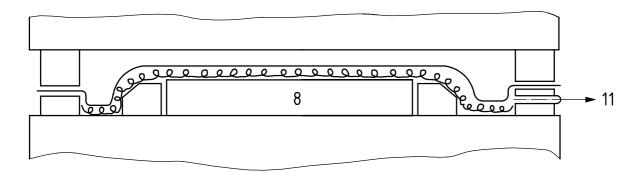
Typical test plate assembly for moulding in an autoclave
